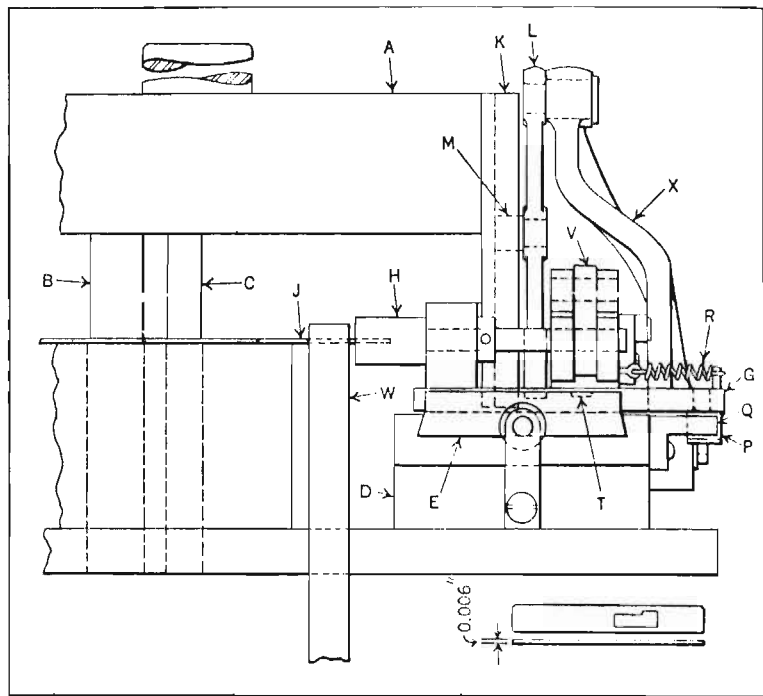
Front Elevation of Mechanism for Transferring Parts Direct from the Die to the Stacking Rod
